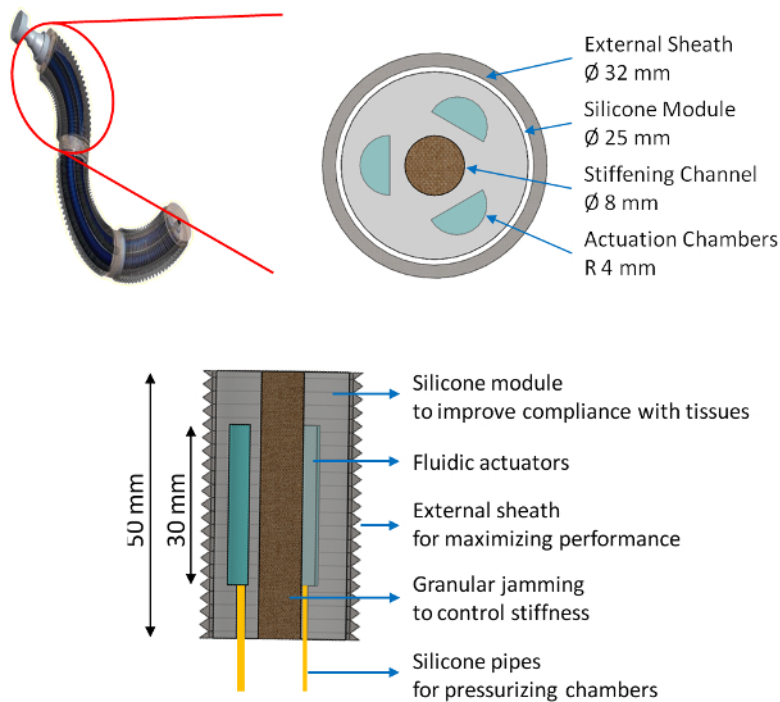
Concept of the manipulator and CAD of the module. The manipulator is based on a multi-module approach. The single unit is constituted by a soft cylinder embedding three fluidic actuators, one central channel housing the granular jamming, three pipes to supply the pressure and an external braided sheath to improve module motion.
